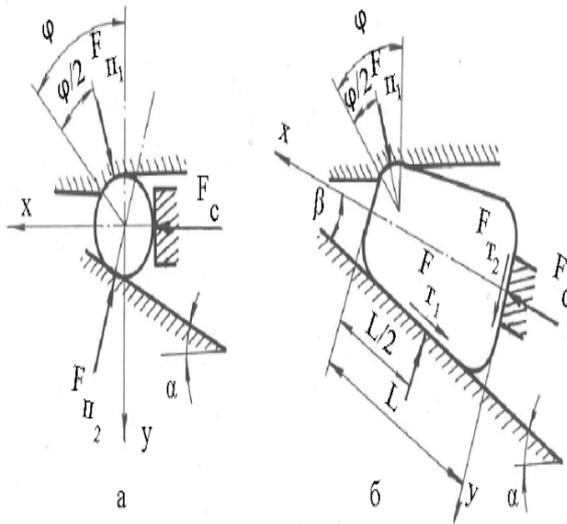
Loading of the deforming element: a) ball; b) roller.
